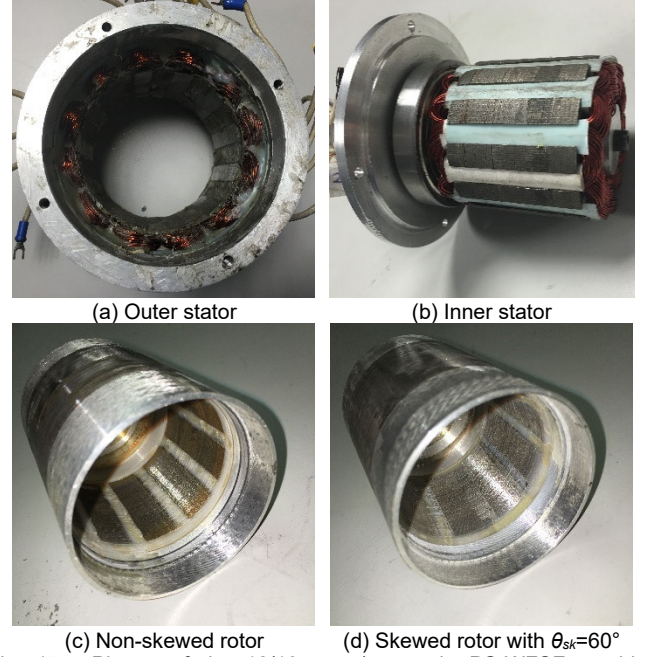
Photos of the 12/10-stator/rotor-pole PS-WFSF machine prototypes with non-skewed and skewed rotors.
